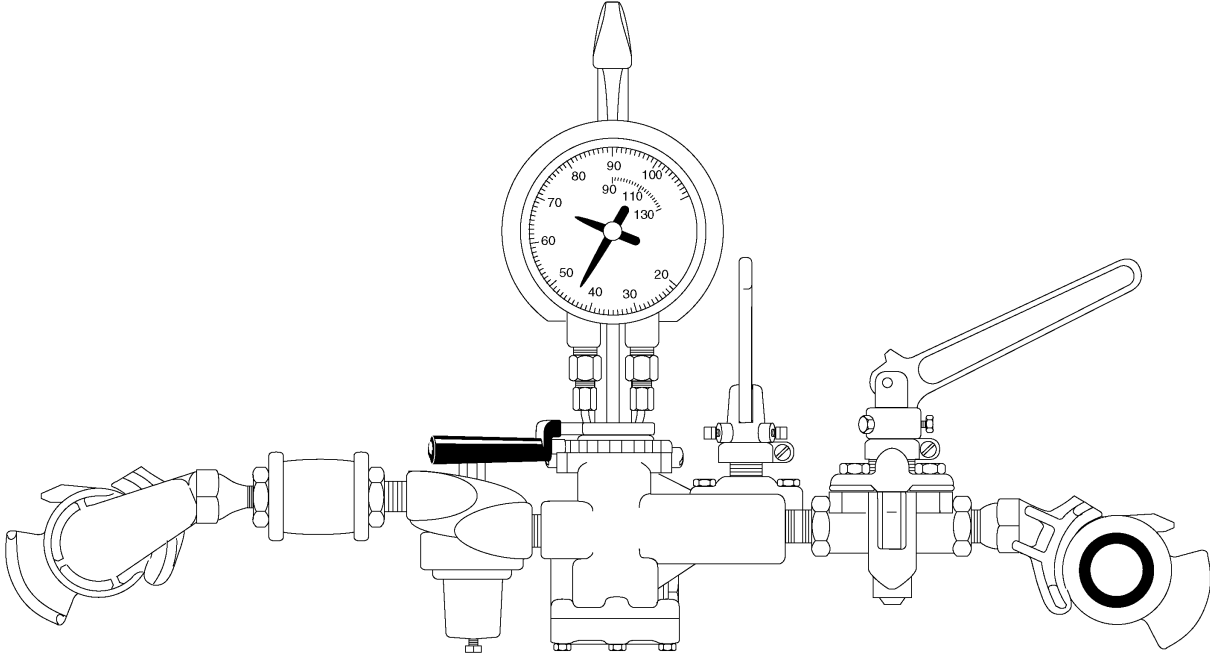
Standard Passenger Single Car Testing Device with FLOWRATOR (SPFRS designation)
